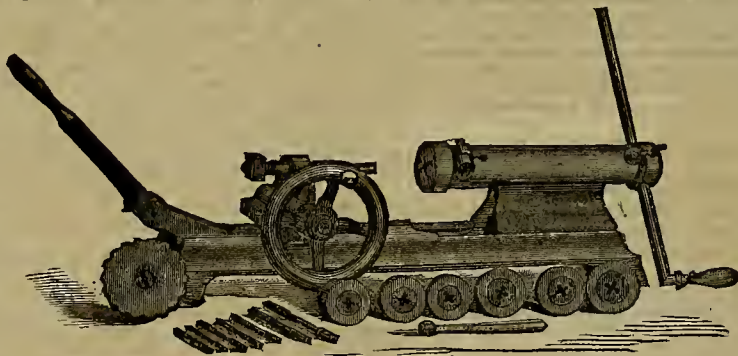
BOLT CUTTER AND NUT TAPPER.
